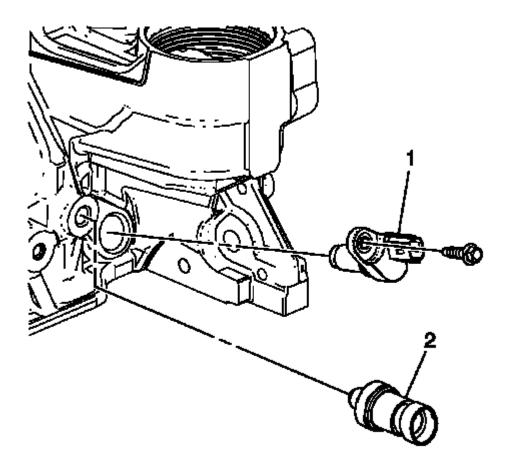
Locating Block Plugs Courtesy of GENERAL MOTORS COMPANY
